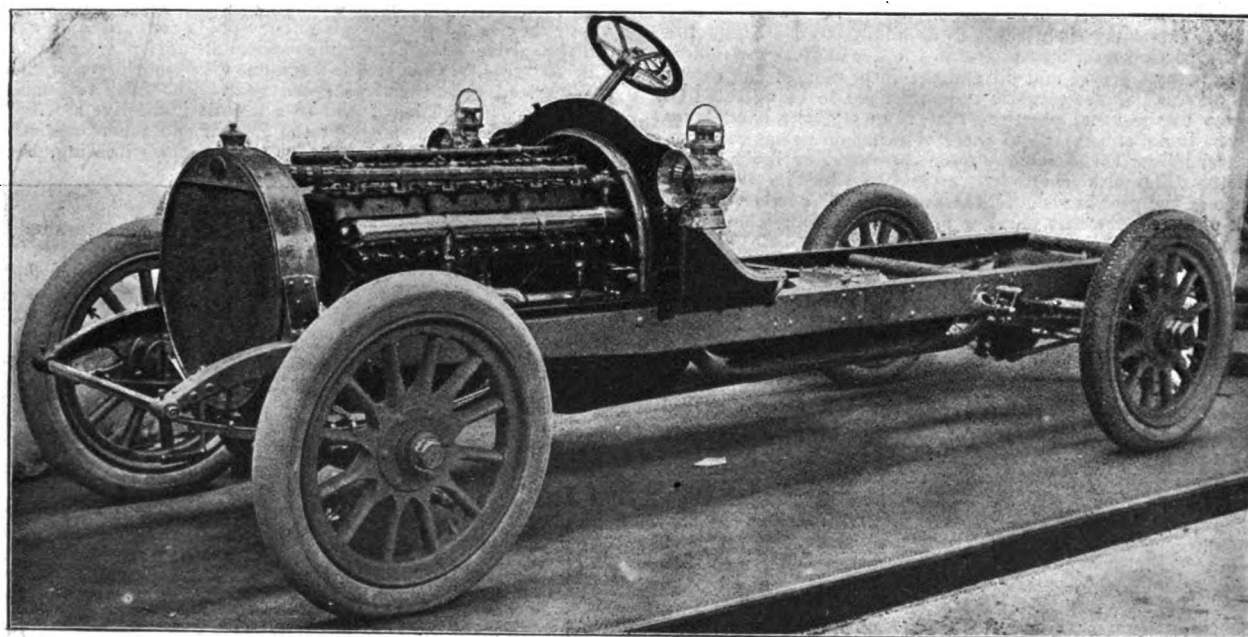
The M.M.C. 35-45-h.p. Six-Cylinder Chassis.
